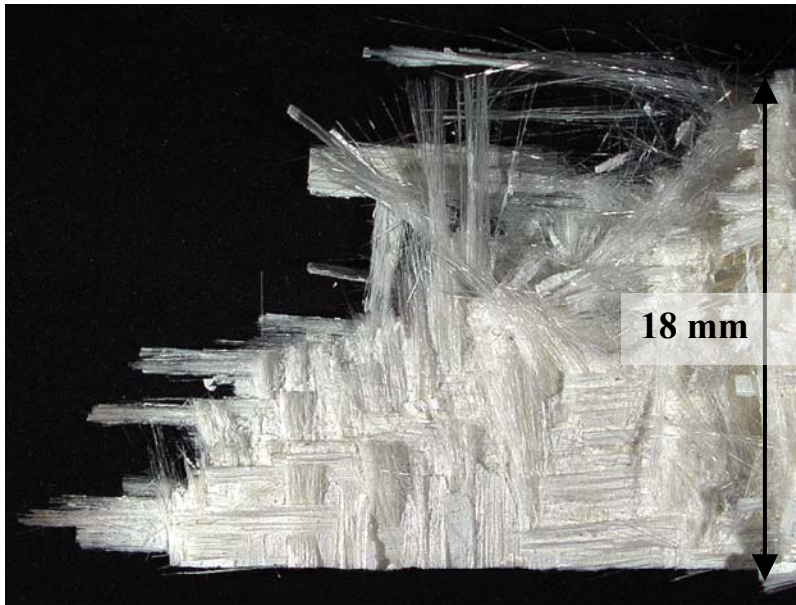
Fracture surface of N720/A specimen tested in compression to failure in steam at 1200°C in displacement control at -0.05 mm/s.
